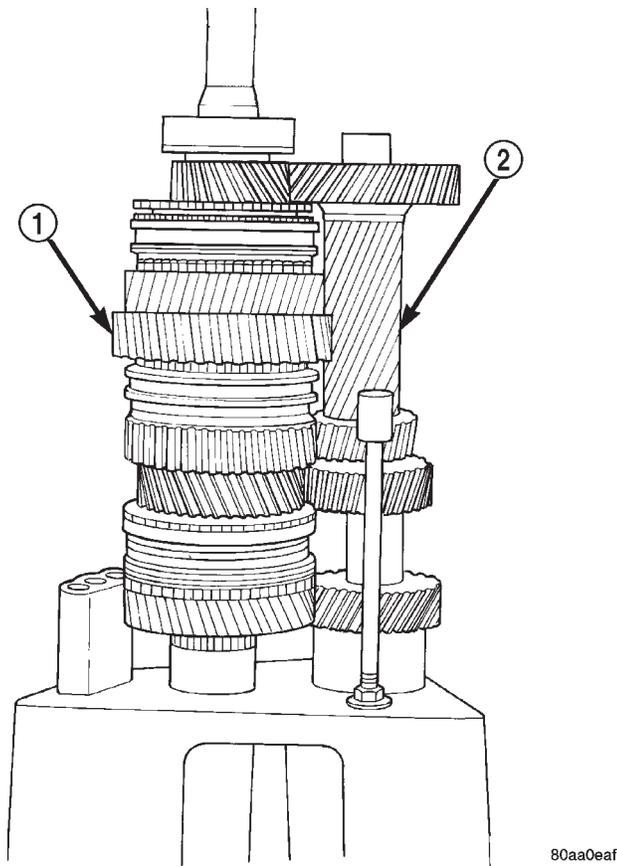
OUTPUT SHAFT AND GEARTRAIN
